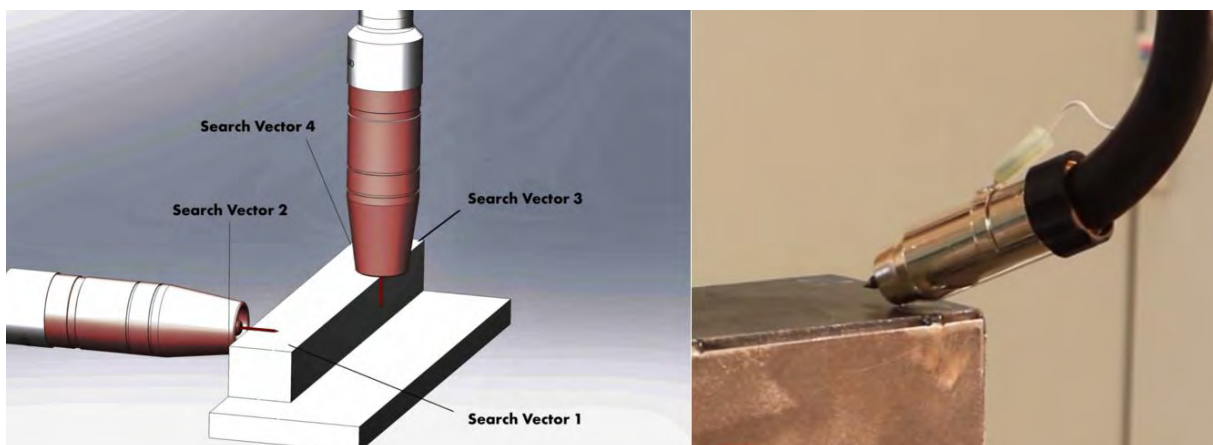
Wire touch sensing (left) and tactile nozzle touch sensing method (right) [HUB21]
